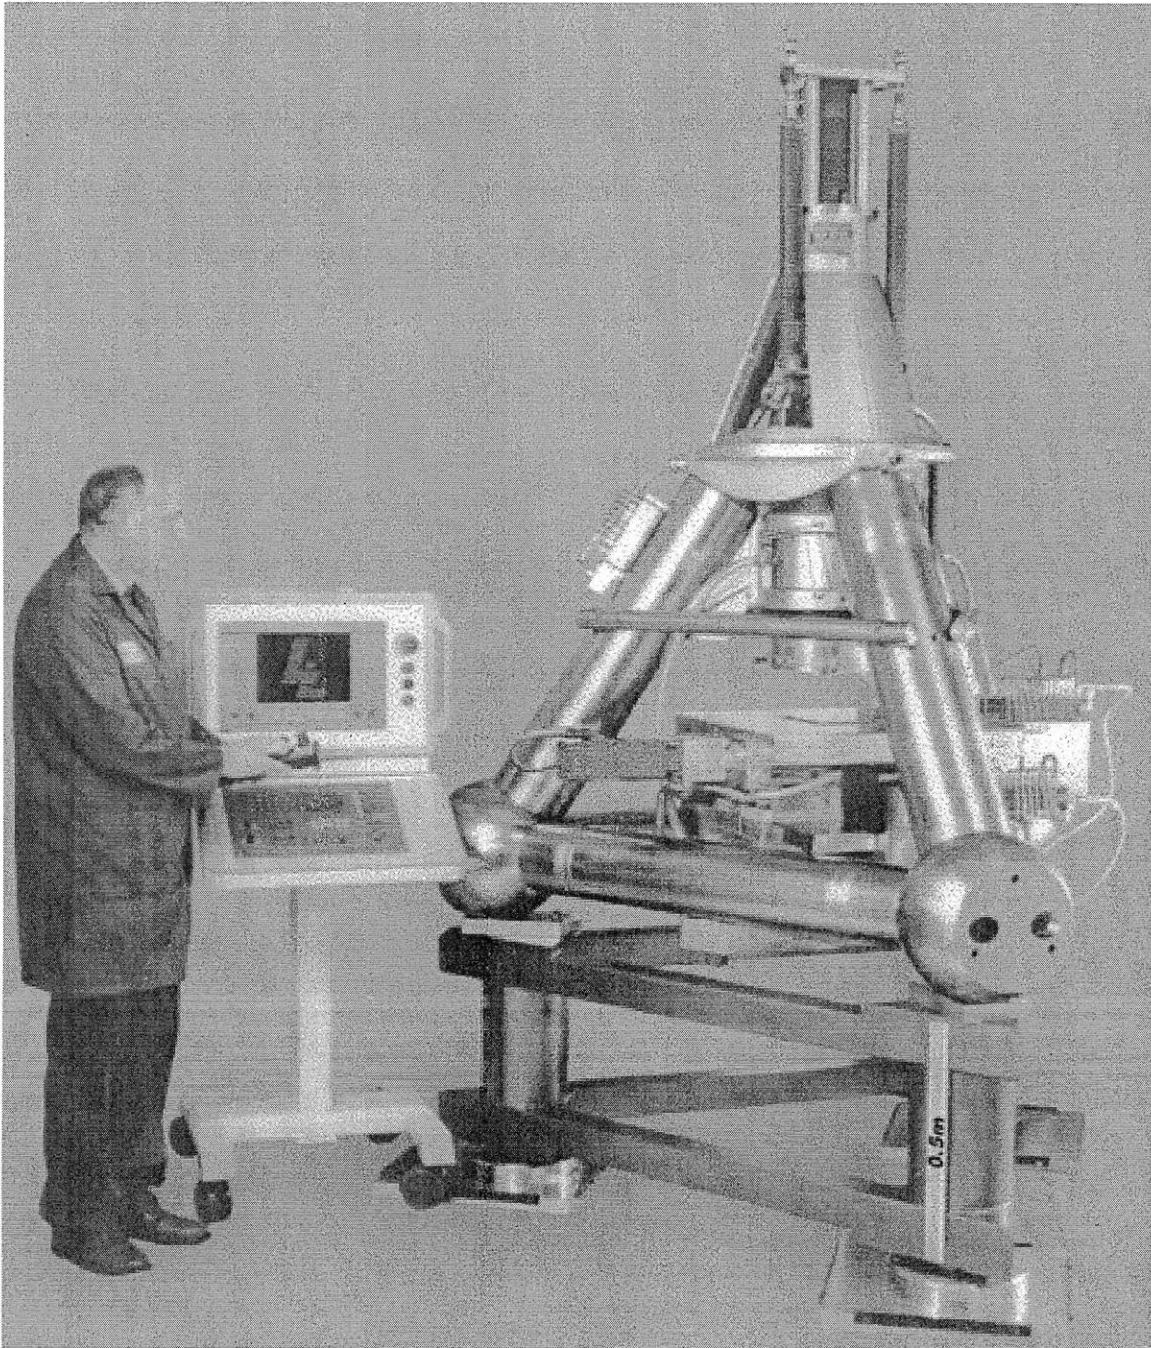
pin jointed, internally damped space frame machine design, [39]
